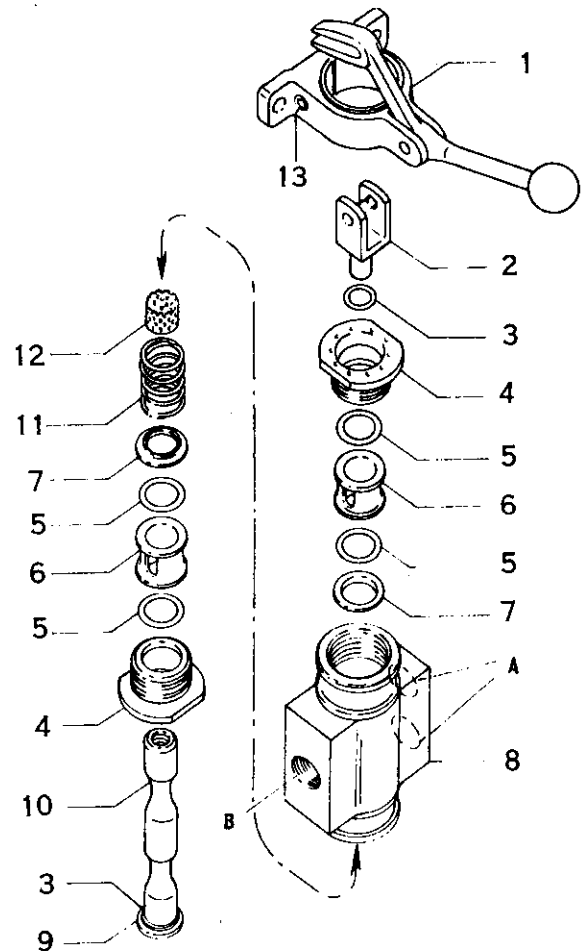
WINCH CONTROL VALVE (EXPLODED VIEW)
